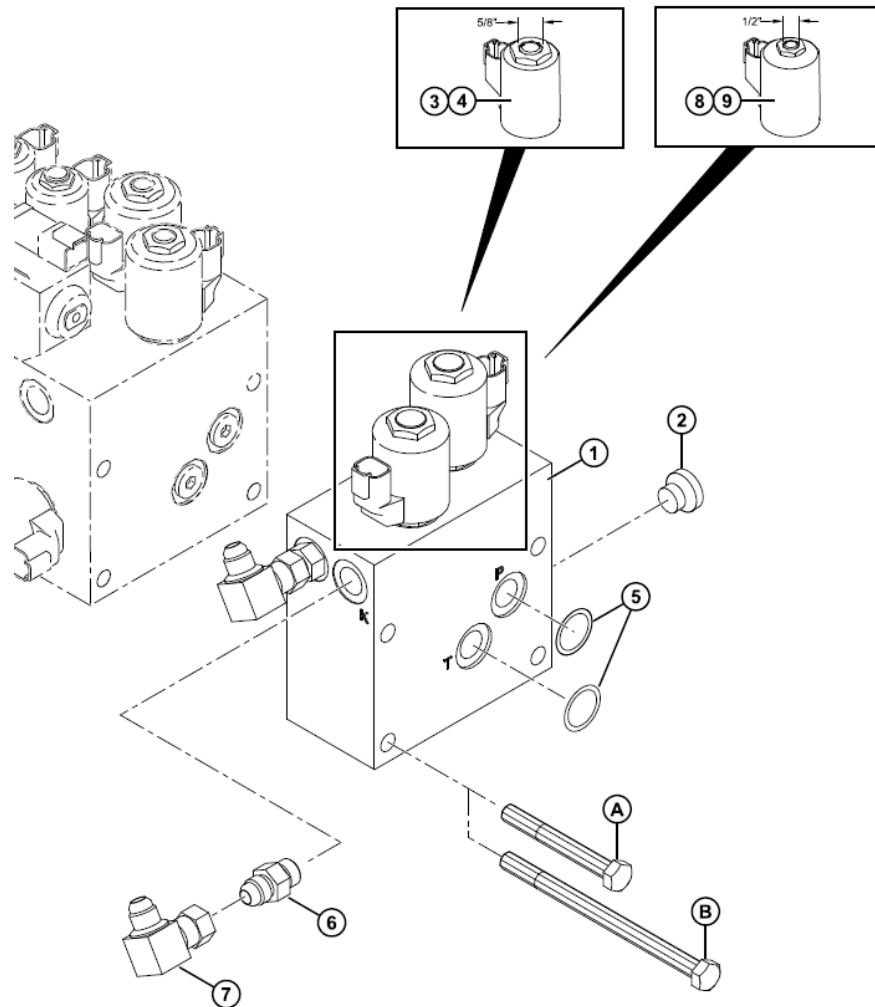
Auxiliary valve block for a double acting hydraulic cylinder. Adapted from [9].
